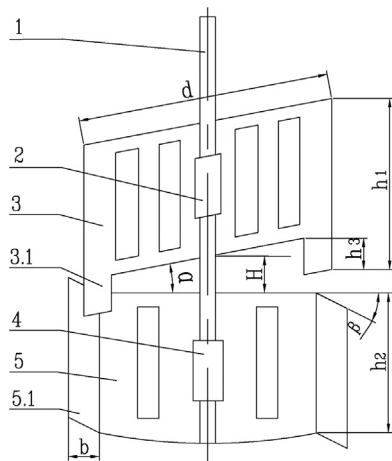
Structure of novel large-double-blade impeller. 1-stirring shaft, 2-upper shaft sleeve, 3-upper blade, 3.1-extension plate, 4-lower shaft sleeve, 5-lower blade, 5.1-flanged plate.
